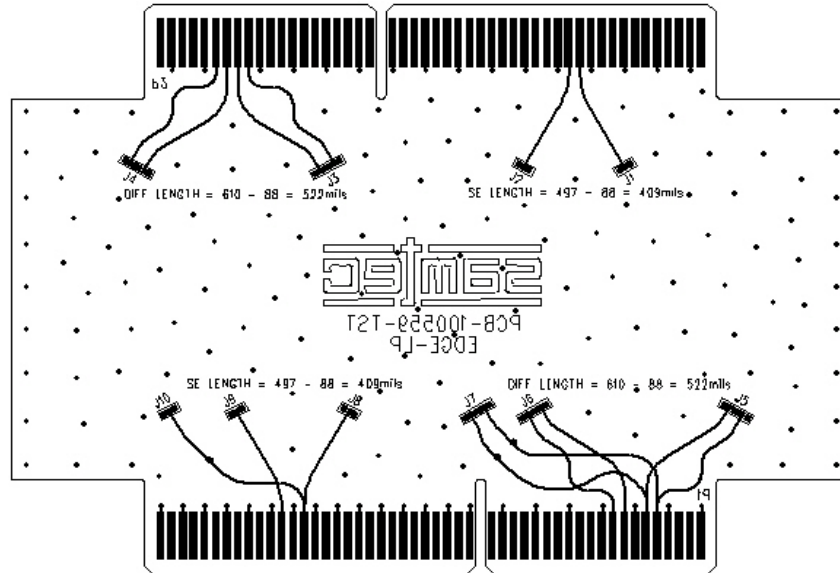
PCB-100559-TST, EDGE-LP, Dual Configuration Edge-Card Fixture Used for All Long Signal Path Measurements
